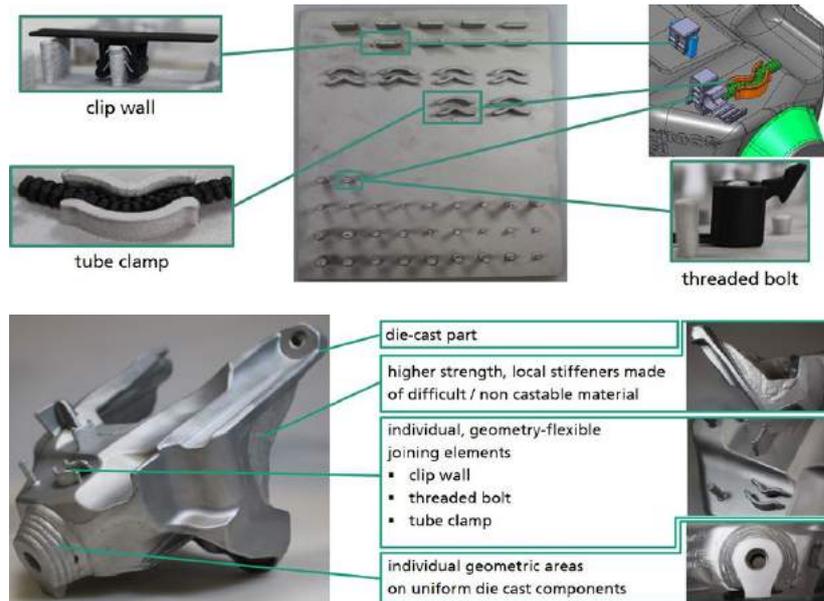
Die-cast substrate component with additively manufactured reinforcement structures and connecting elements
